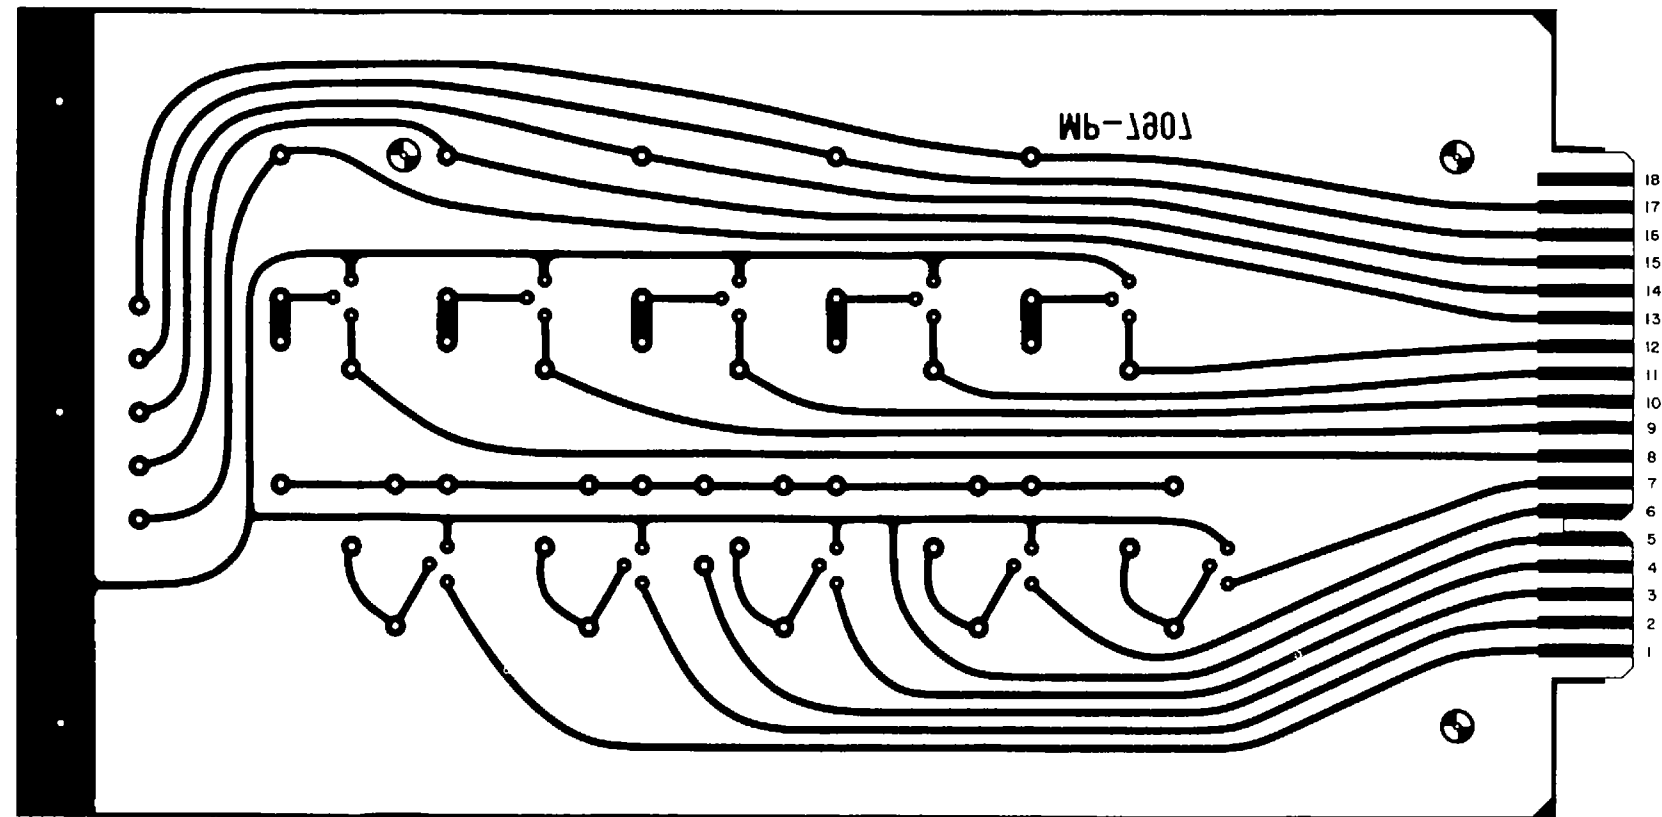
Inverter regulator control 3A1, parts location and printed wiring diagram.
